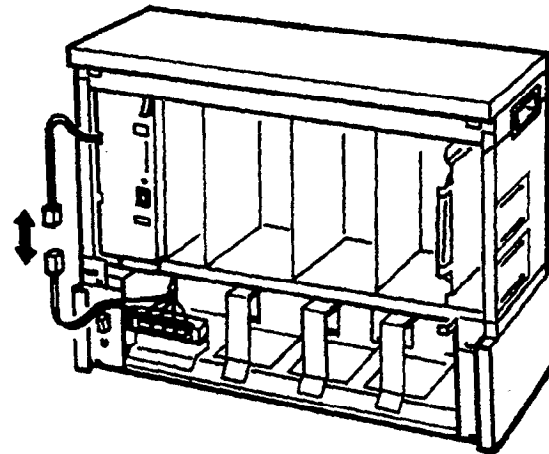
Connecting the PSF-P-20 PSU to the Terminal Board
